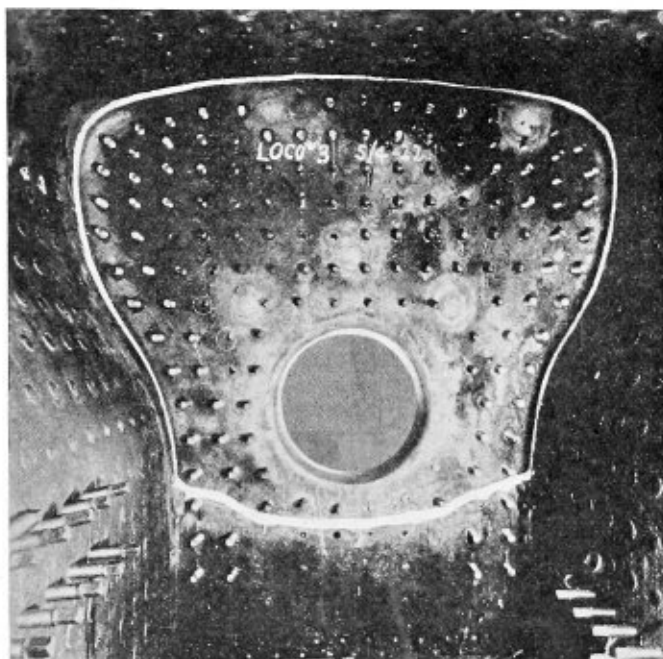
Door Sheet Welded Into Superheater Type Locomotive Boiler
